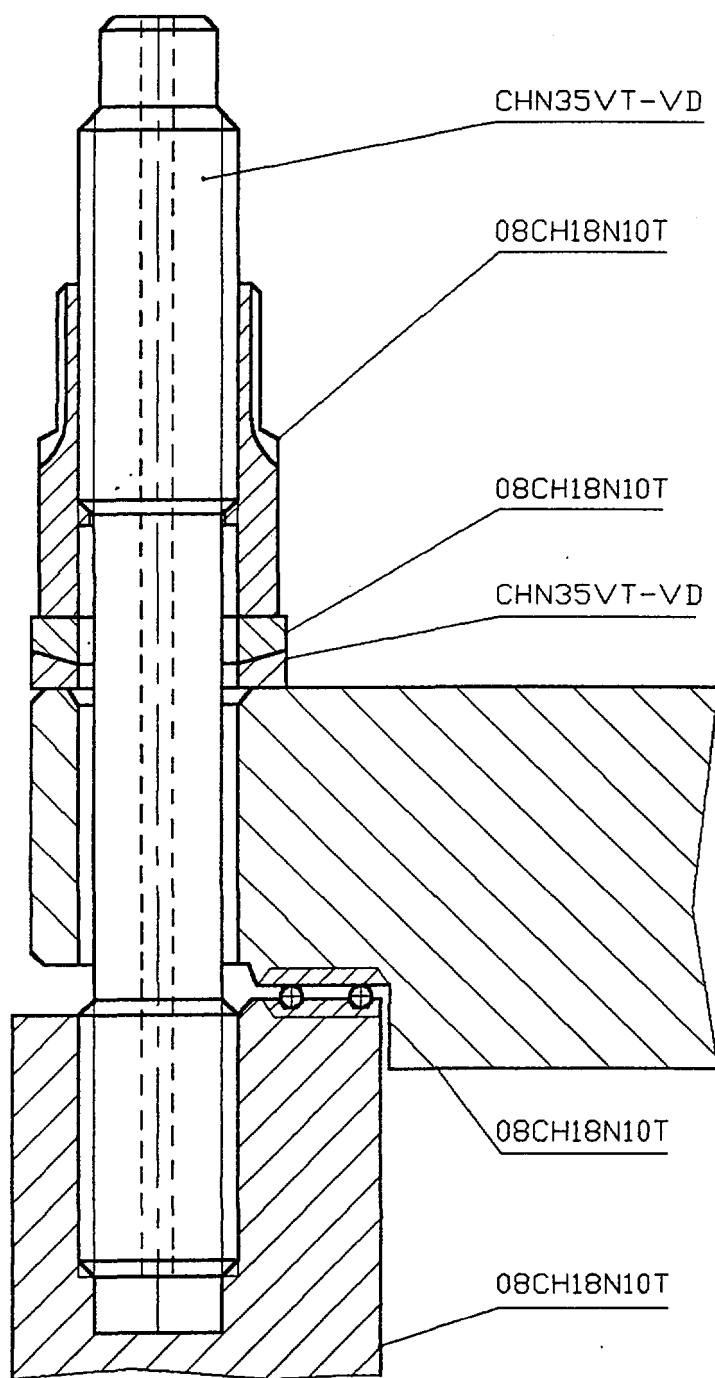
Schematic drawing of WWER 440 SG primary collector bolted joint.
